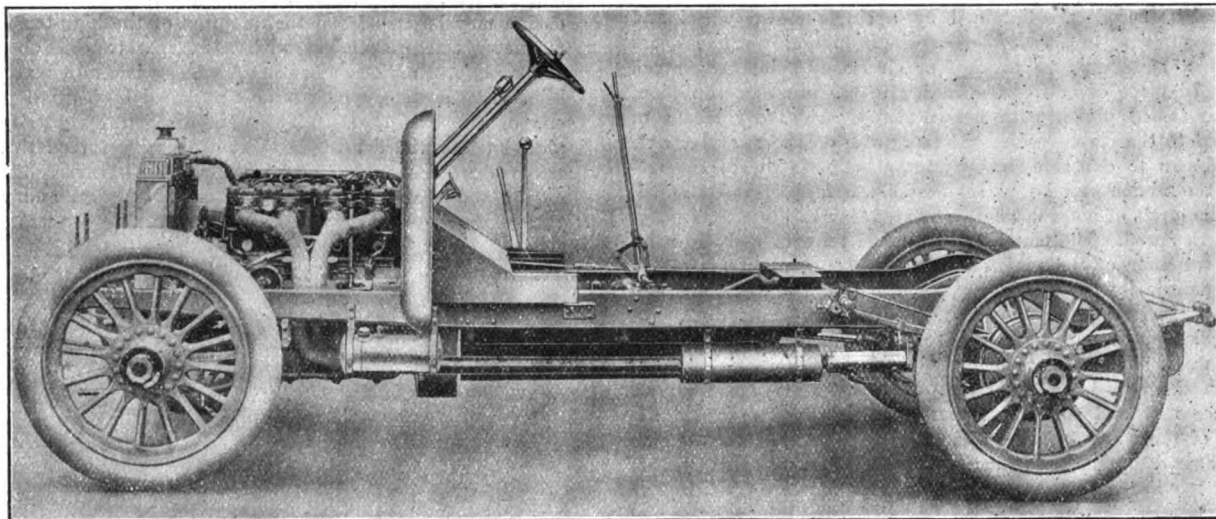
Chassis of Daimler 38-h.p. Car with new Silent Engine.
